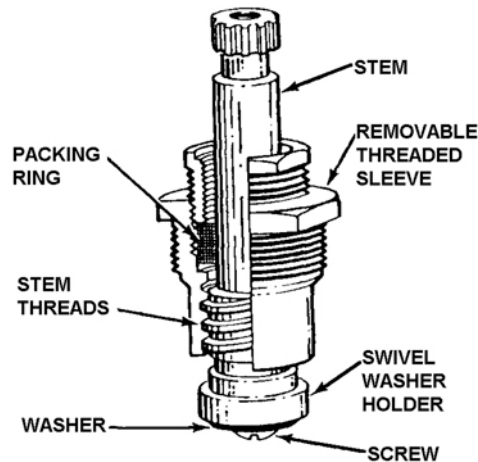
Cutaway view of a faucet stem and sleeve assembly.
